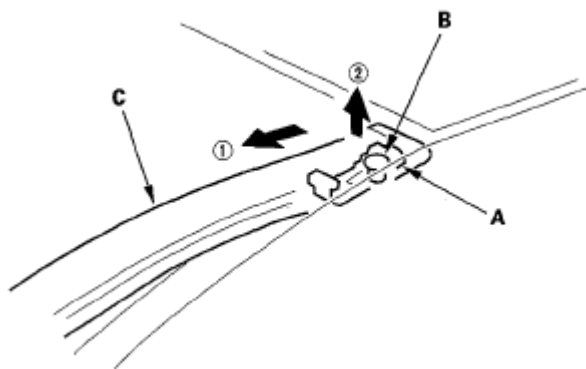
Releasing Rear Bracket, Pin And Roof Molding
